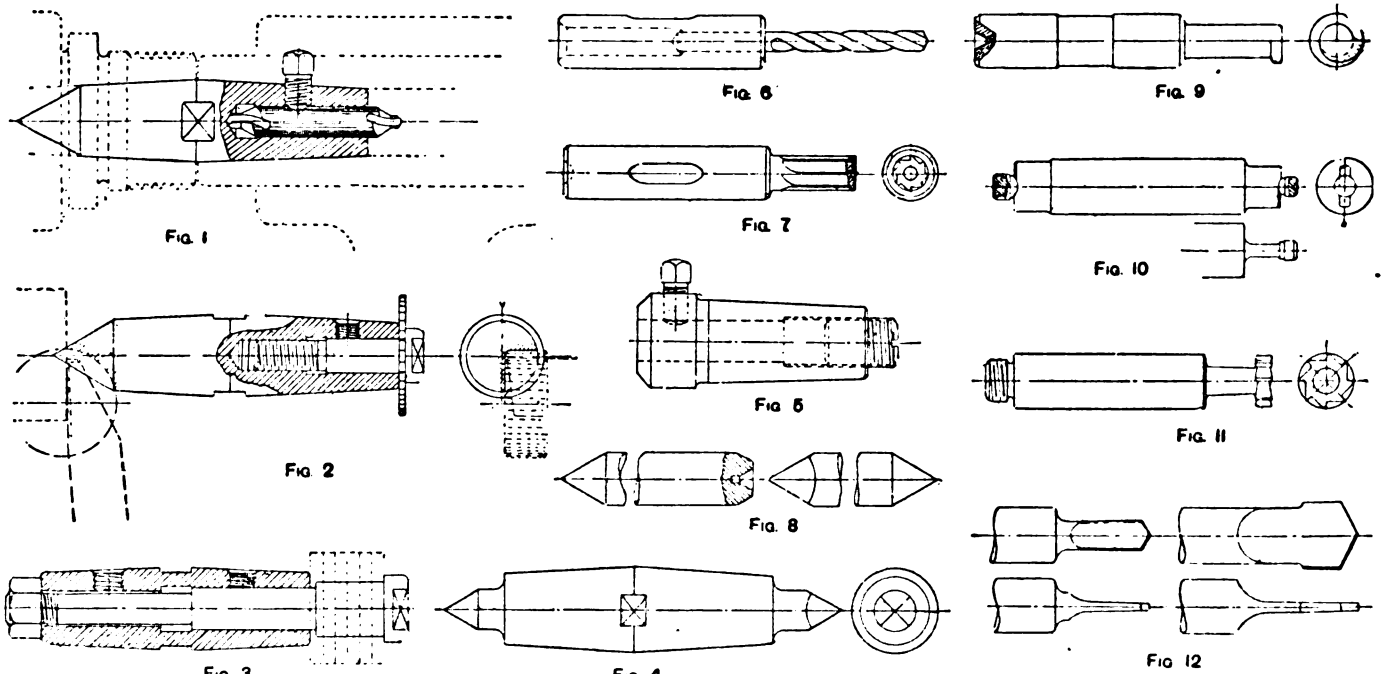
shows how drills smaller and larger than the shank diameter are made. Properly made and ground, these drills retain their size until worn out. They are slightly tapered (about five-thousandths of an inch) on the edged of the blade or cutting part. They should be ground on the end or cutting edges only. The opposite ends of these drills may, be utilized as other tools, or two drills combined in one.
